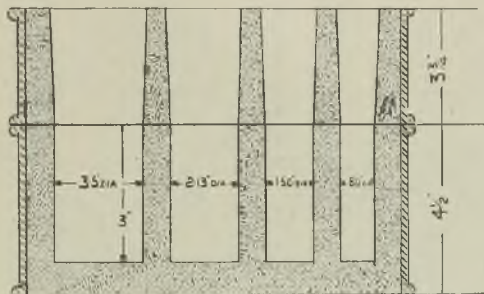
METHOD OF MOULDING TEST-BARS.
